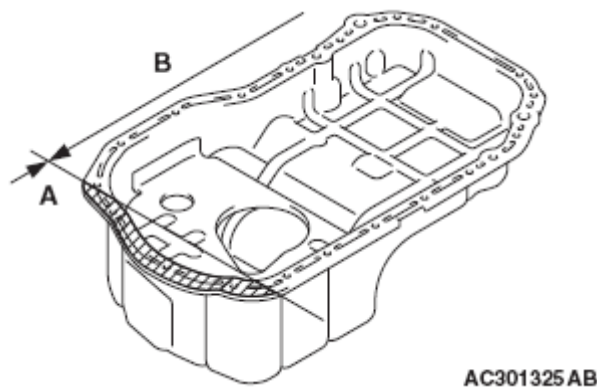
Identifying Special Tool Tapping Range Between Cylinder Block And Engine Oil Pan
